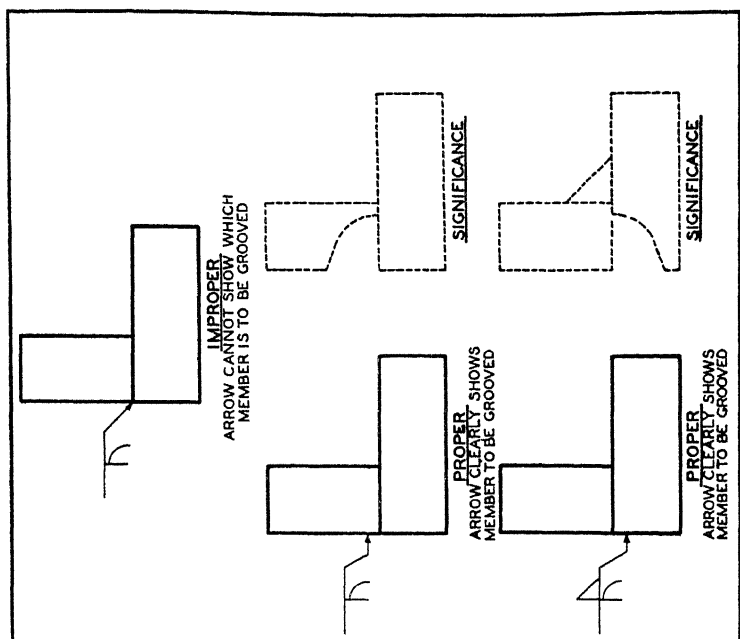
Use of arrows in section or end view to indicate which member is to be grooved, when welds are not shown.
